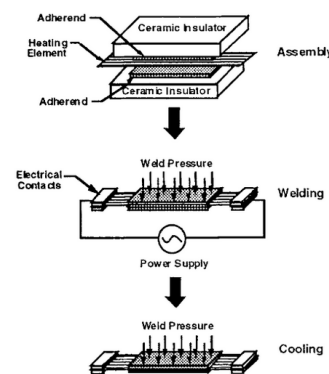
Resistance Welding Set-up and Process Steps (PDL 2008, 83)
